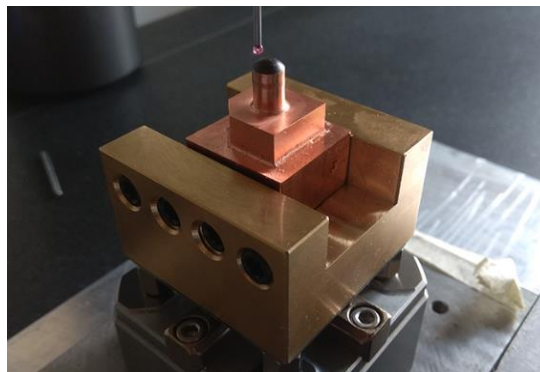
Measuring of the Copper spherical shaped tool electrode after EDM.
